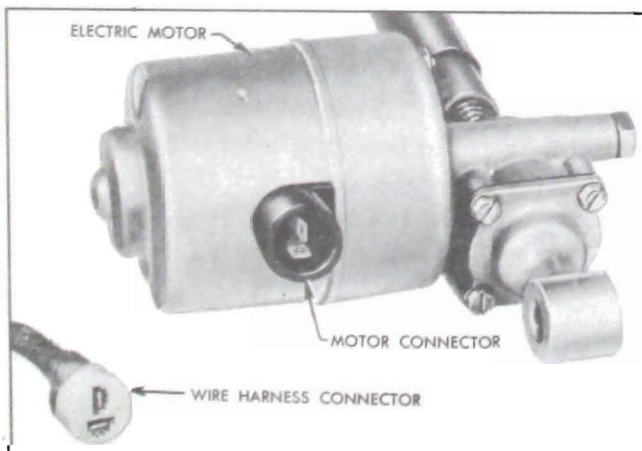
Socket and Blade Type Connector for Seat Motor
